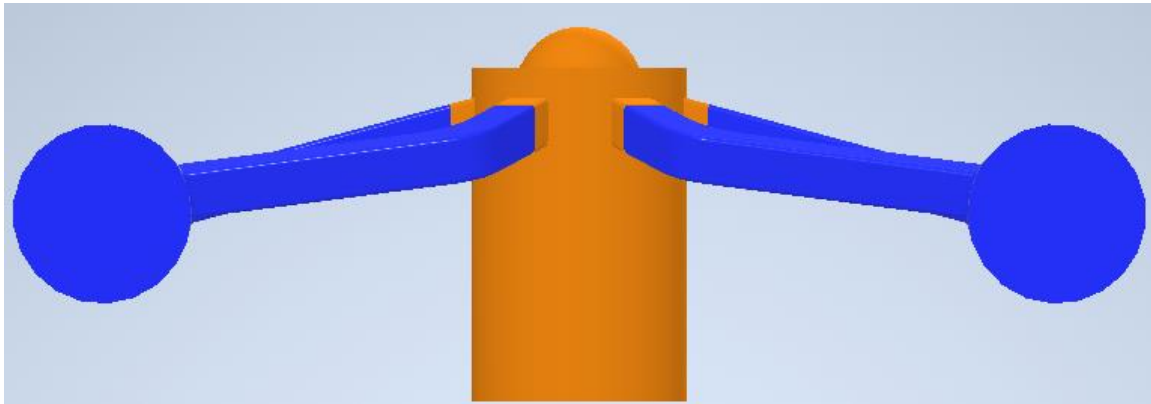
Front view of the intake manifold for the tumble opposed piston engine design
